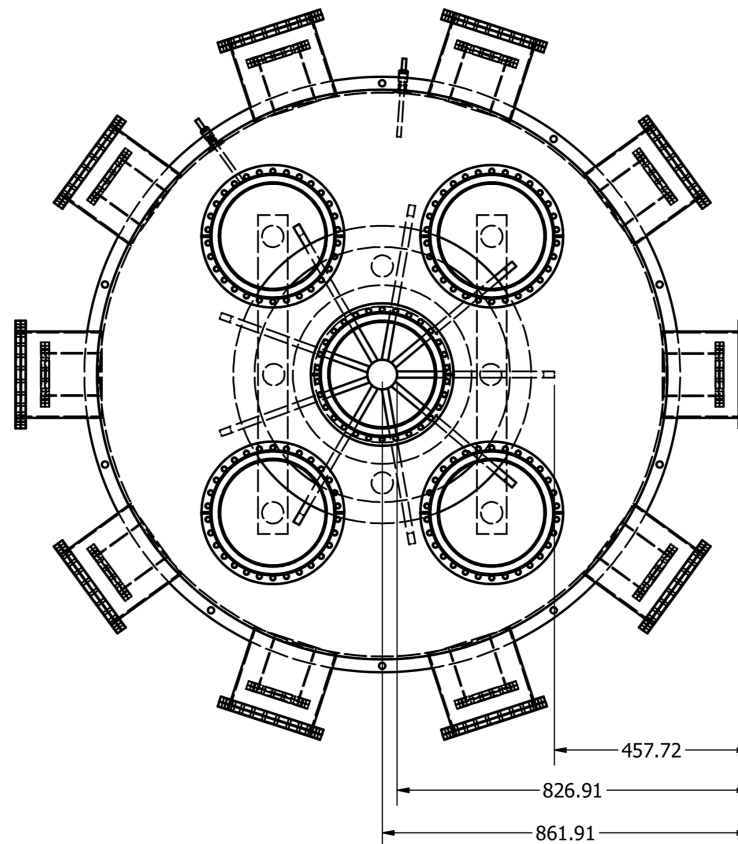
Top view diagram of MEDUSA-CR vacuum vessel in millimeters.
